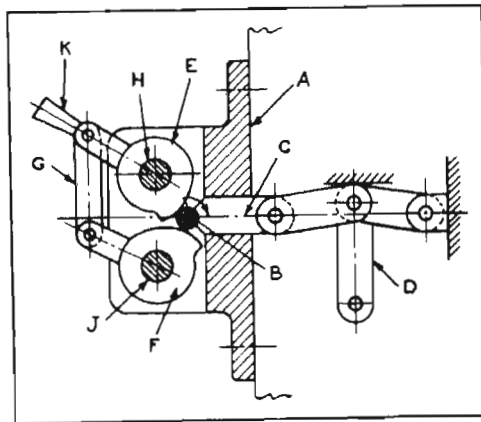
This anchoring chuck prevents one end of the steel rod from rotating.
